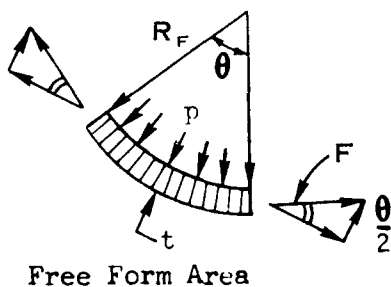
CROSS SECTION OF RUBBER FORMED BEAD
